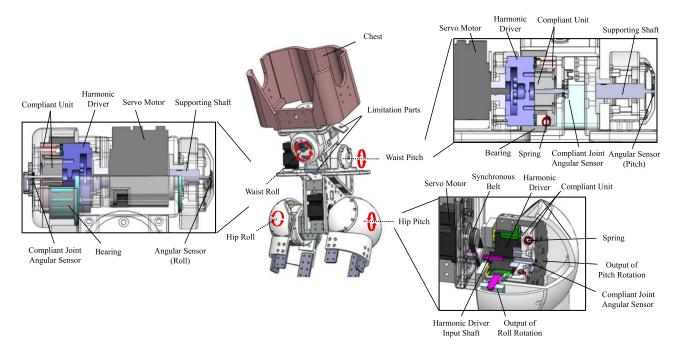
Three-dimensional drawing of proposed mechanical design of trunk with waist and hip joints.
